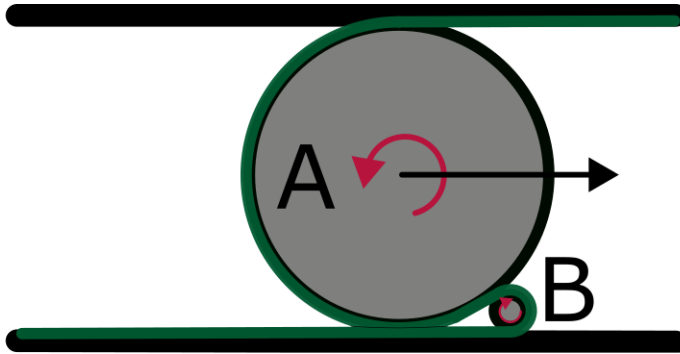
A rolamite mechanism to fabricate tape springs; the smaller roller B deforms spring steel plastically and uniformly. This creates a tape spring with a constant radius.
